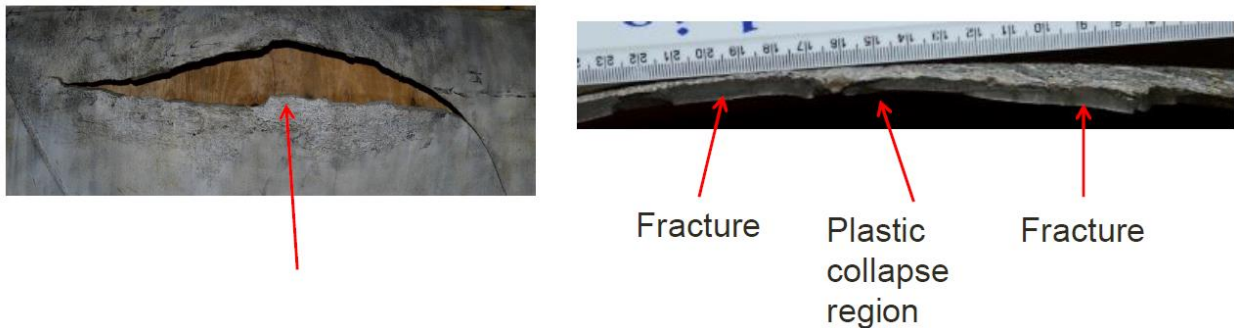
The Tested Pipe 2 Containing Corrosion Flaw after the Rupture Test
